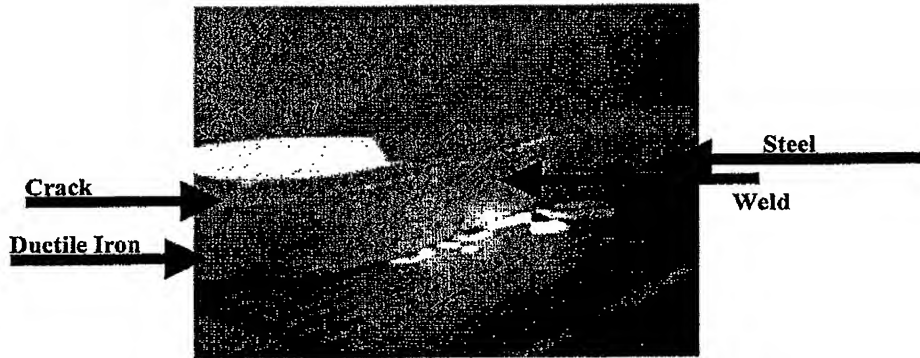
Ferritic ductile iron – steel welded assembly after bending test.
